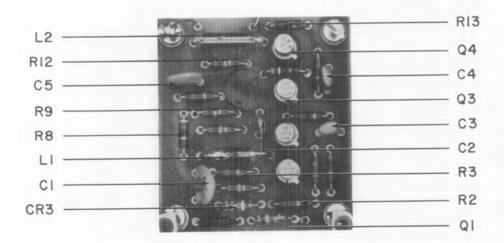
Part 11736/1 FM Limiter Assembly, Component Locations
